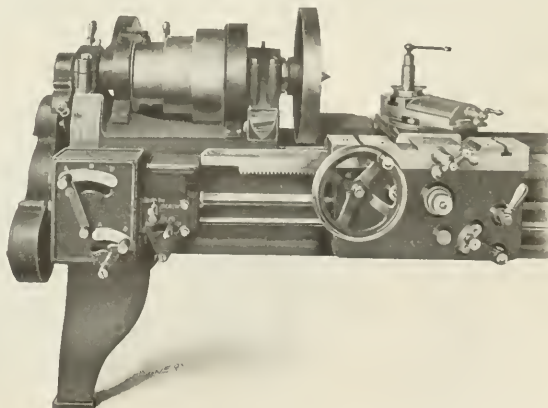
"Roulsted" Engine Lathe equipped with Compound Rest
